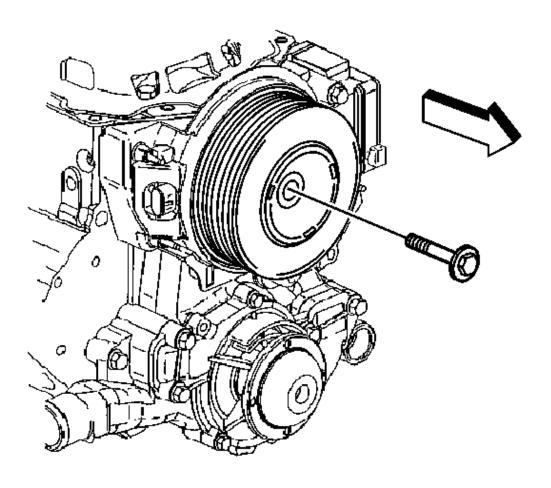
View Of Crankshaft Balancer Bolt Courtesy of GENERAL MOTORS CORP.
